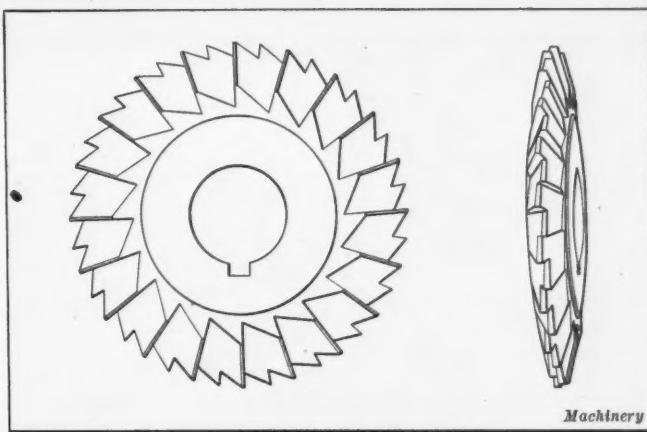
Kind of Cutter used on Pratt & Whitney Thread Milling Machine
